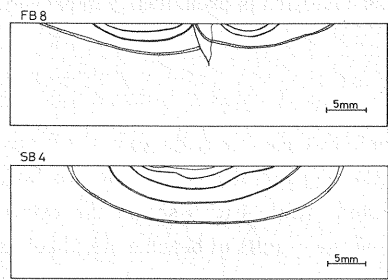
Beach Marks on the Failure Surfaces of As-Welded Specimens.
